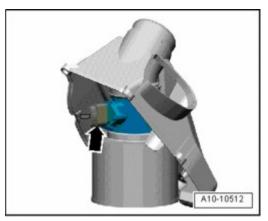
Identifying Electrical Connector On Mass Air Flow Sensor Courtesy of VOLKSWAGEN UNITED STATES, INC.
